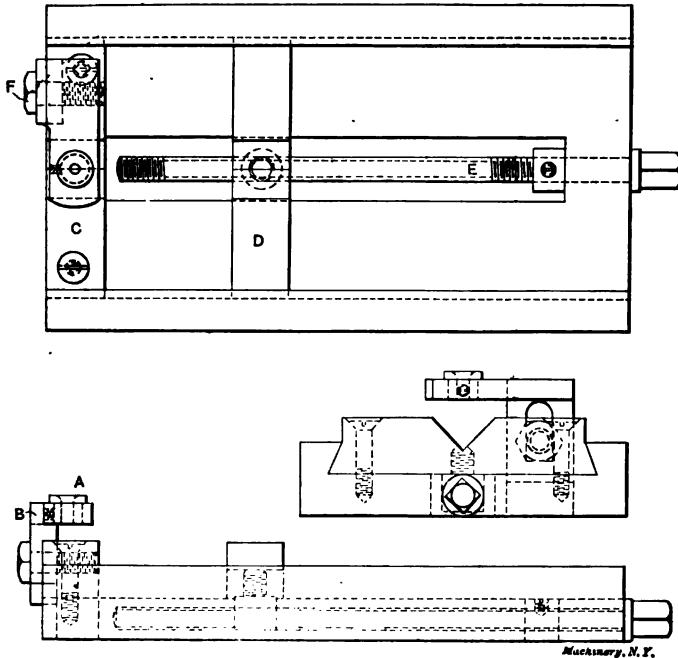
Jig for Drilling Holes in Studs and Shafts.
